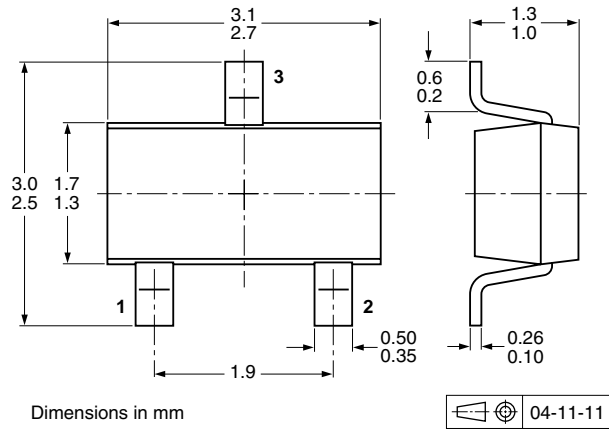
Package outline SOT346 (SC-59A/TO-236)
